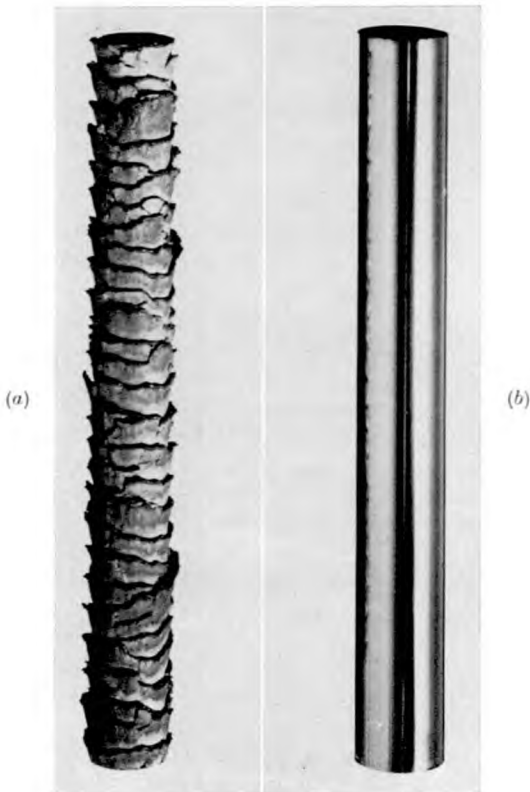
Example of the effect of inserting a small aluminium pad on the die face before extrusion. (a) Billet extruded without a pad; (b) billet extruded with a pad.
